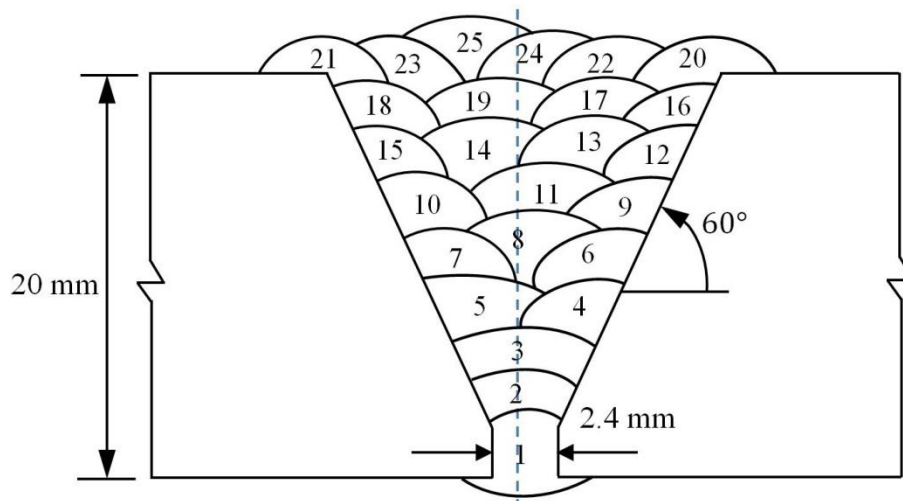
Weld deposition sequence in specimen II (MSAW and FCAW process)
